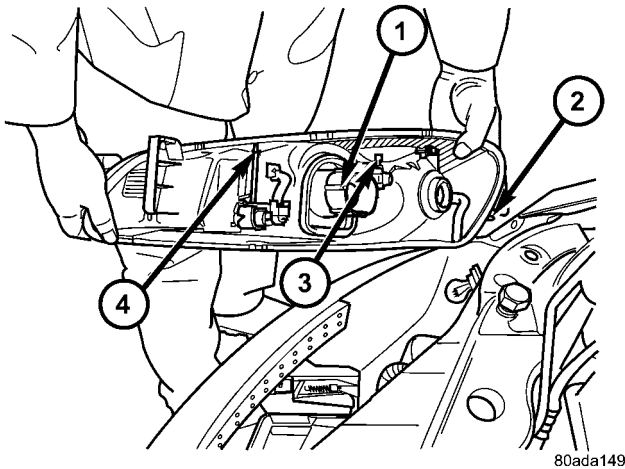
HEADLAMP ALIGNMENT SCREWS
